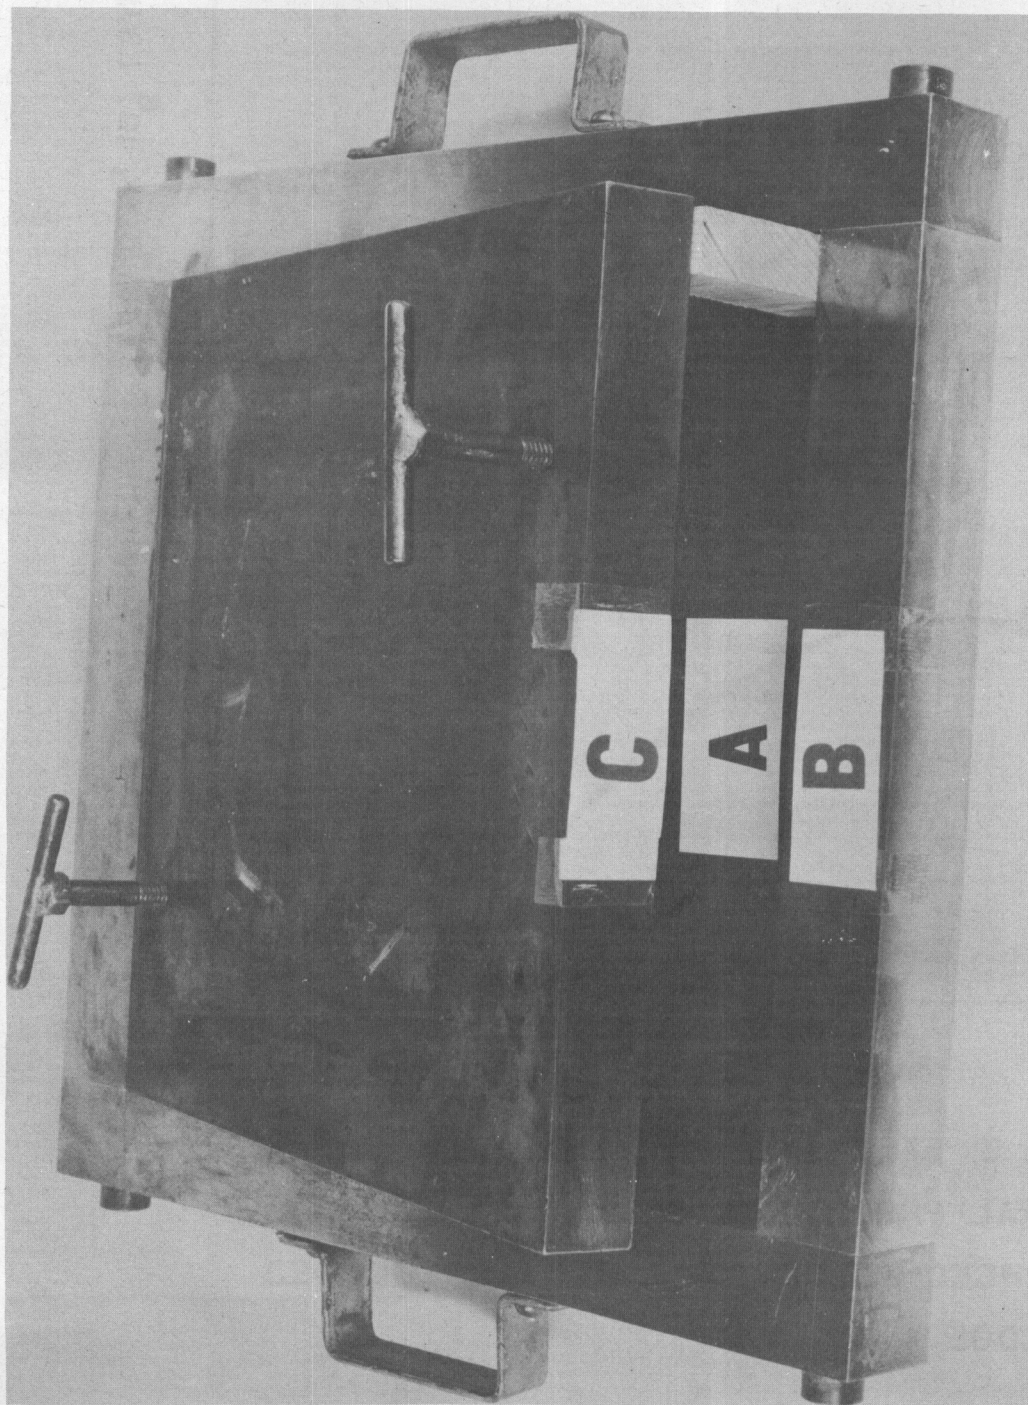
LAMINATING MOLD, PARTLY CLOSED
